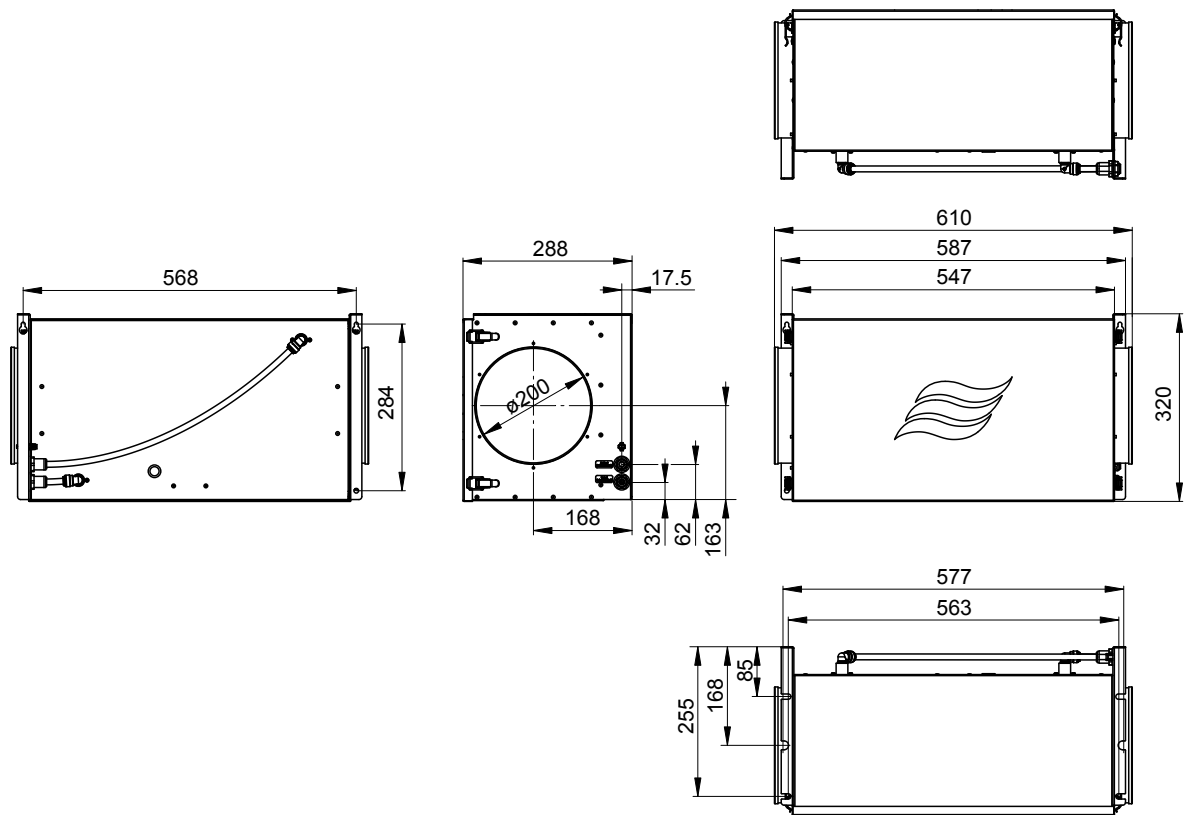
Dimensional drawing of humidifier unit (dimensions in mm)
